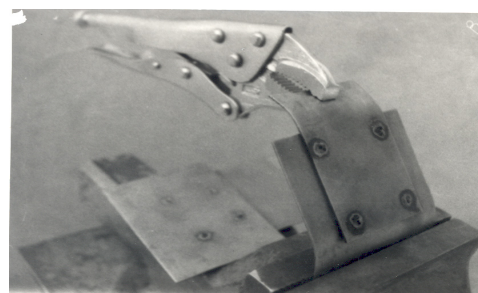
Examples of 1.5mm steel sheet spot-welded to 1.2mm sheet steel.
